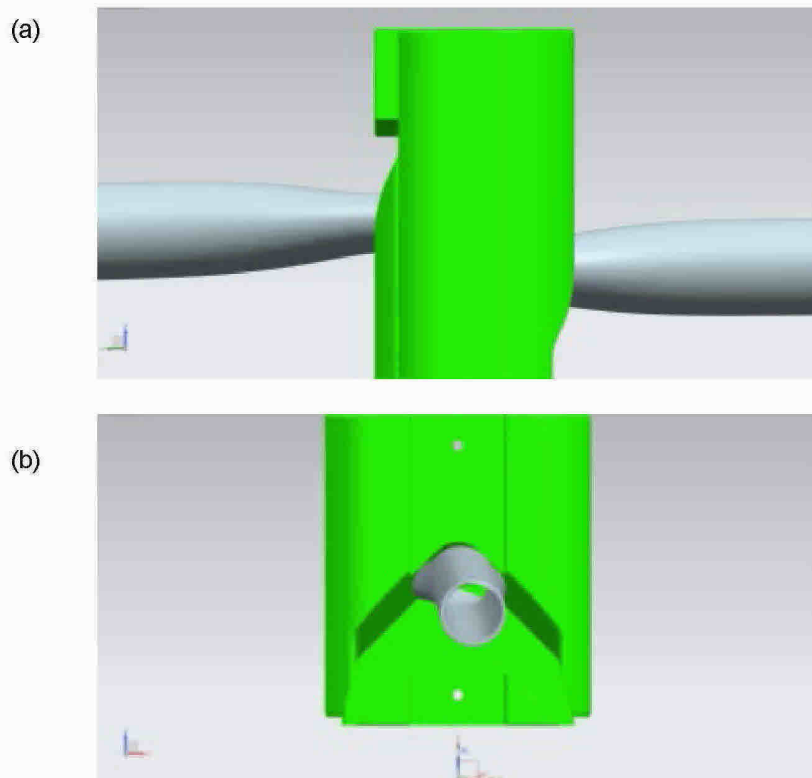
CAD model of "inverse" of post-erosion BSR assembly.
